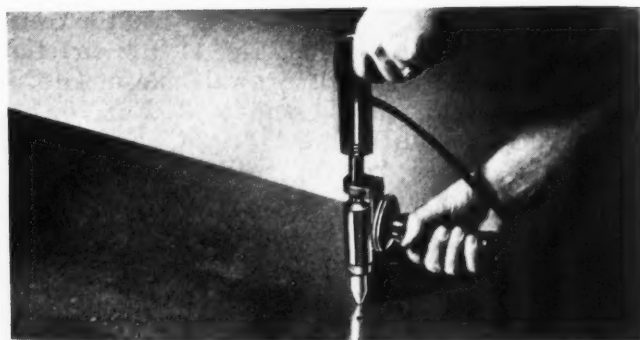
Applying Riveting Iron to Explosive Rivet to Detonate Explosive Charge which Expands Rivet End
